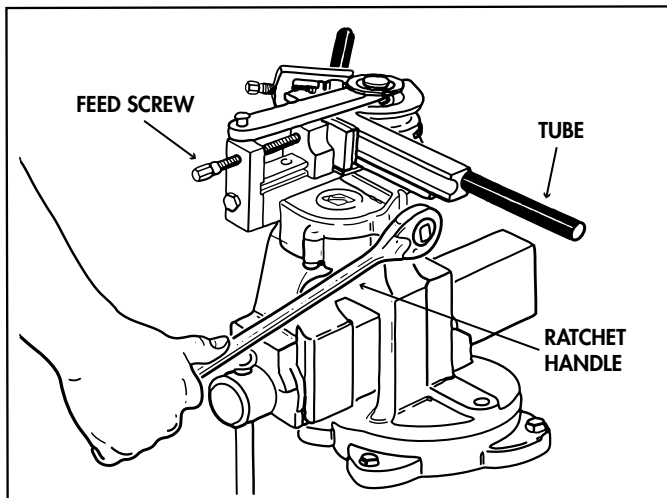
Forming a Bend with Tube Bender Clamped in a Vise
